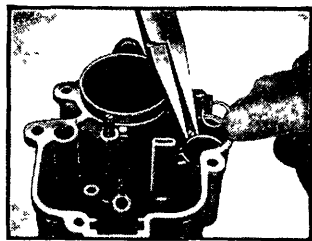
Install ball and pump retainer ring in pump cylinder. 1935 and prior models used pump check needle seat instead of retainer ring
